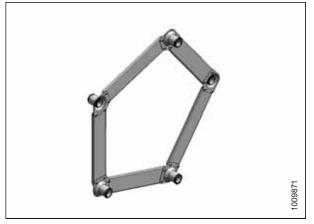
Five-Bat Reinforcing Kit Shown – Six-Bat Reinforcing Kit Similar
